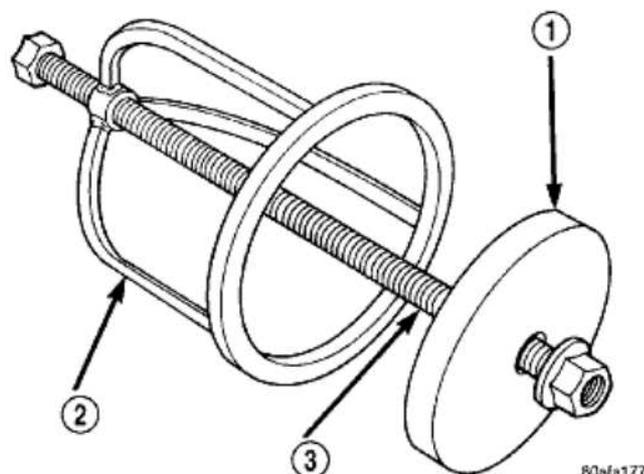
Identifying Spring Compressor 5059-A, Spring Compressor Disc 6057, & Forcing Screw
